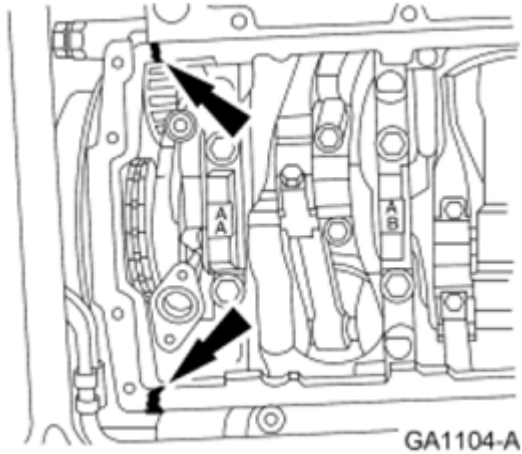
Locating Area For Applying Sealant At Front Cover-To-Cylinder Block Sealing Surface
